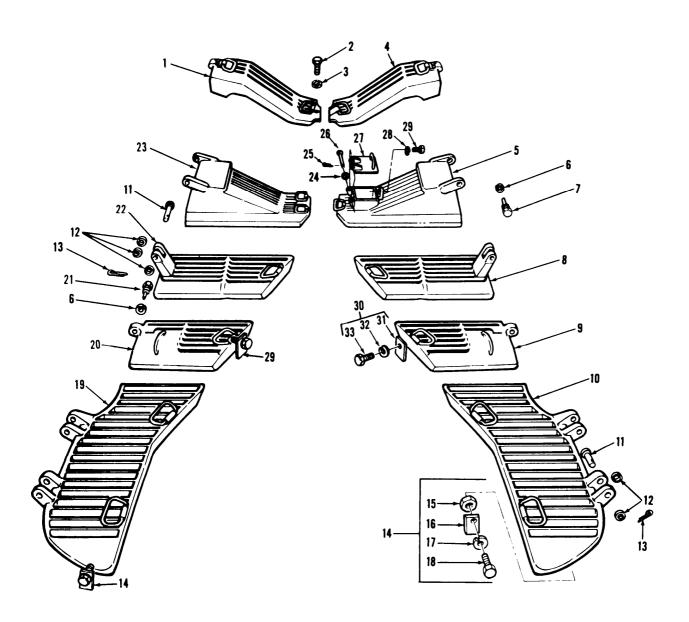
GRILLE DOOR ASSEMBLIES AND RELATED PARTS.
